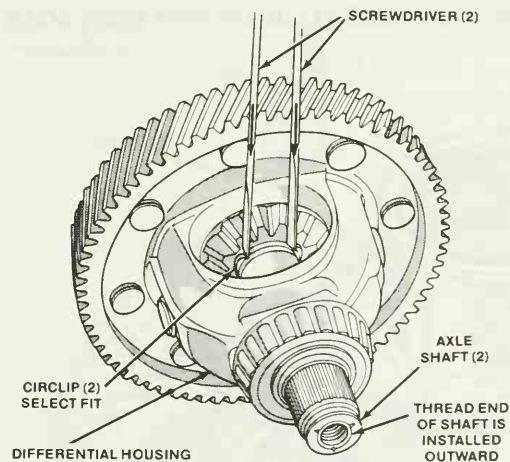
Removing the axle retaining circlips. (Chrysler Corporation)
